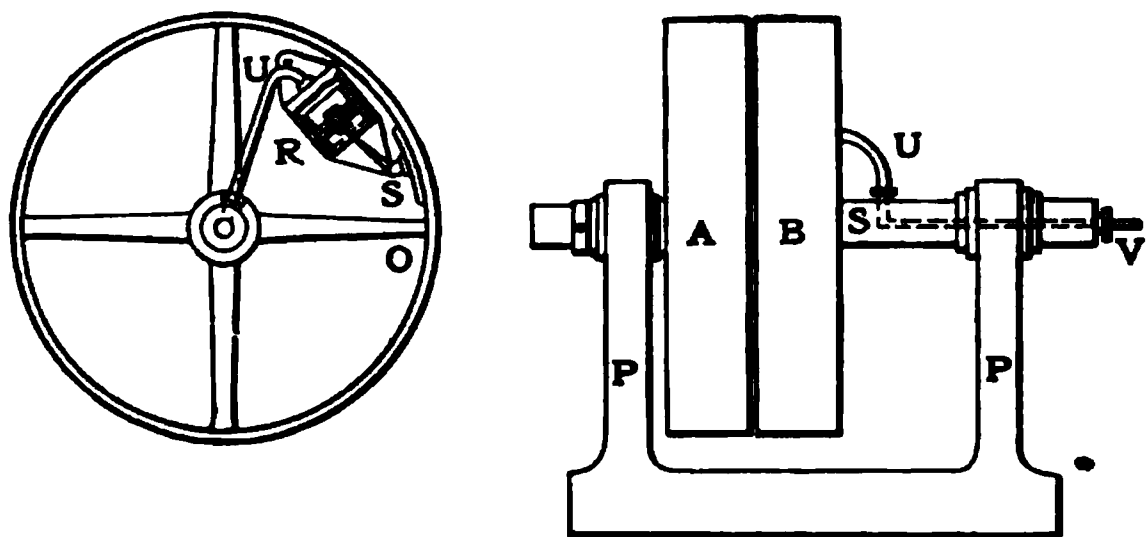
Diagram Showing Pulleys, Pistons, and Shaft of Flather's Dynamometer.
